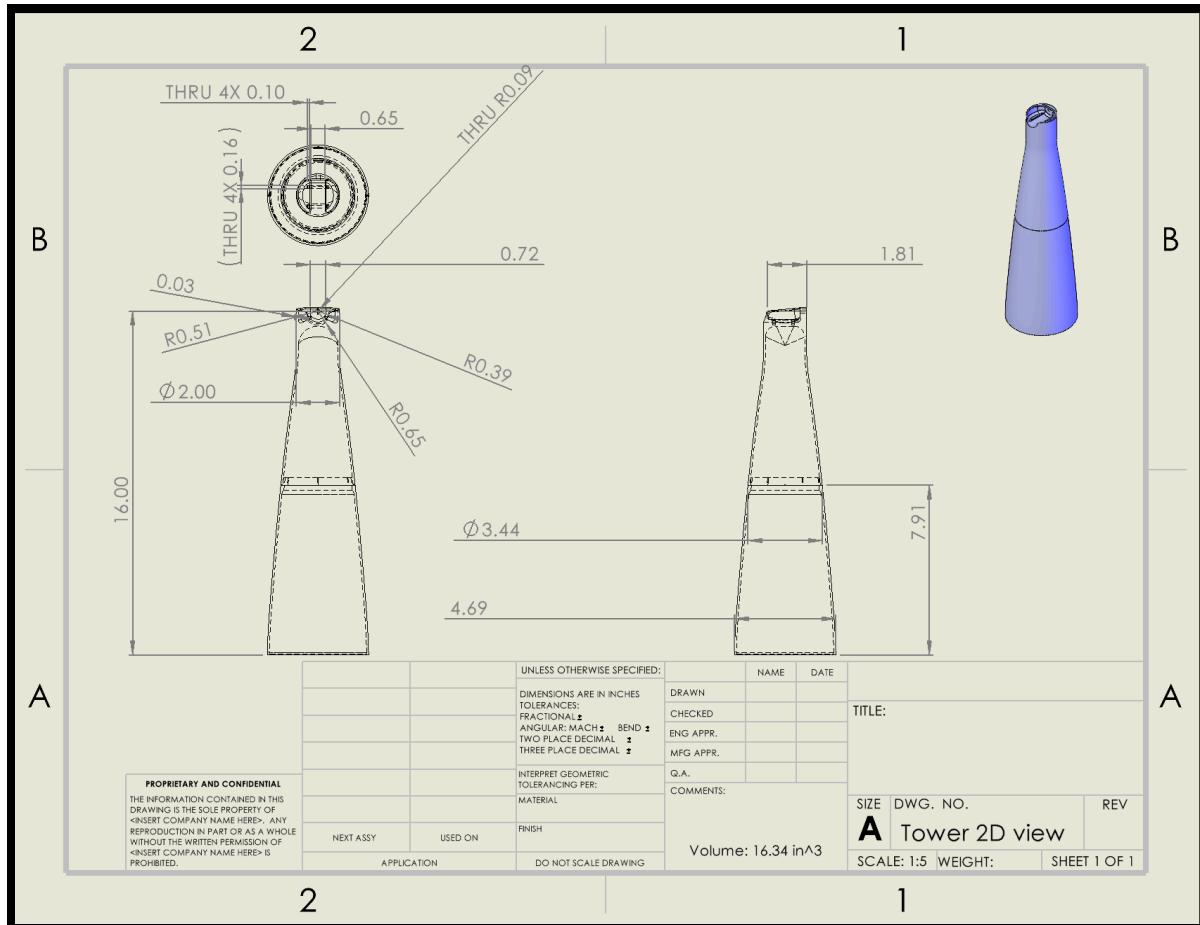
Detailed 2D engineering drawing of the wind turbine tower, showing dimensions and key geometric features for fabrication.
